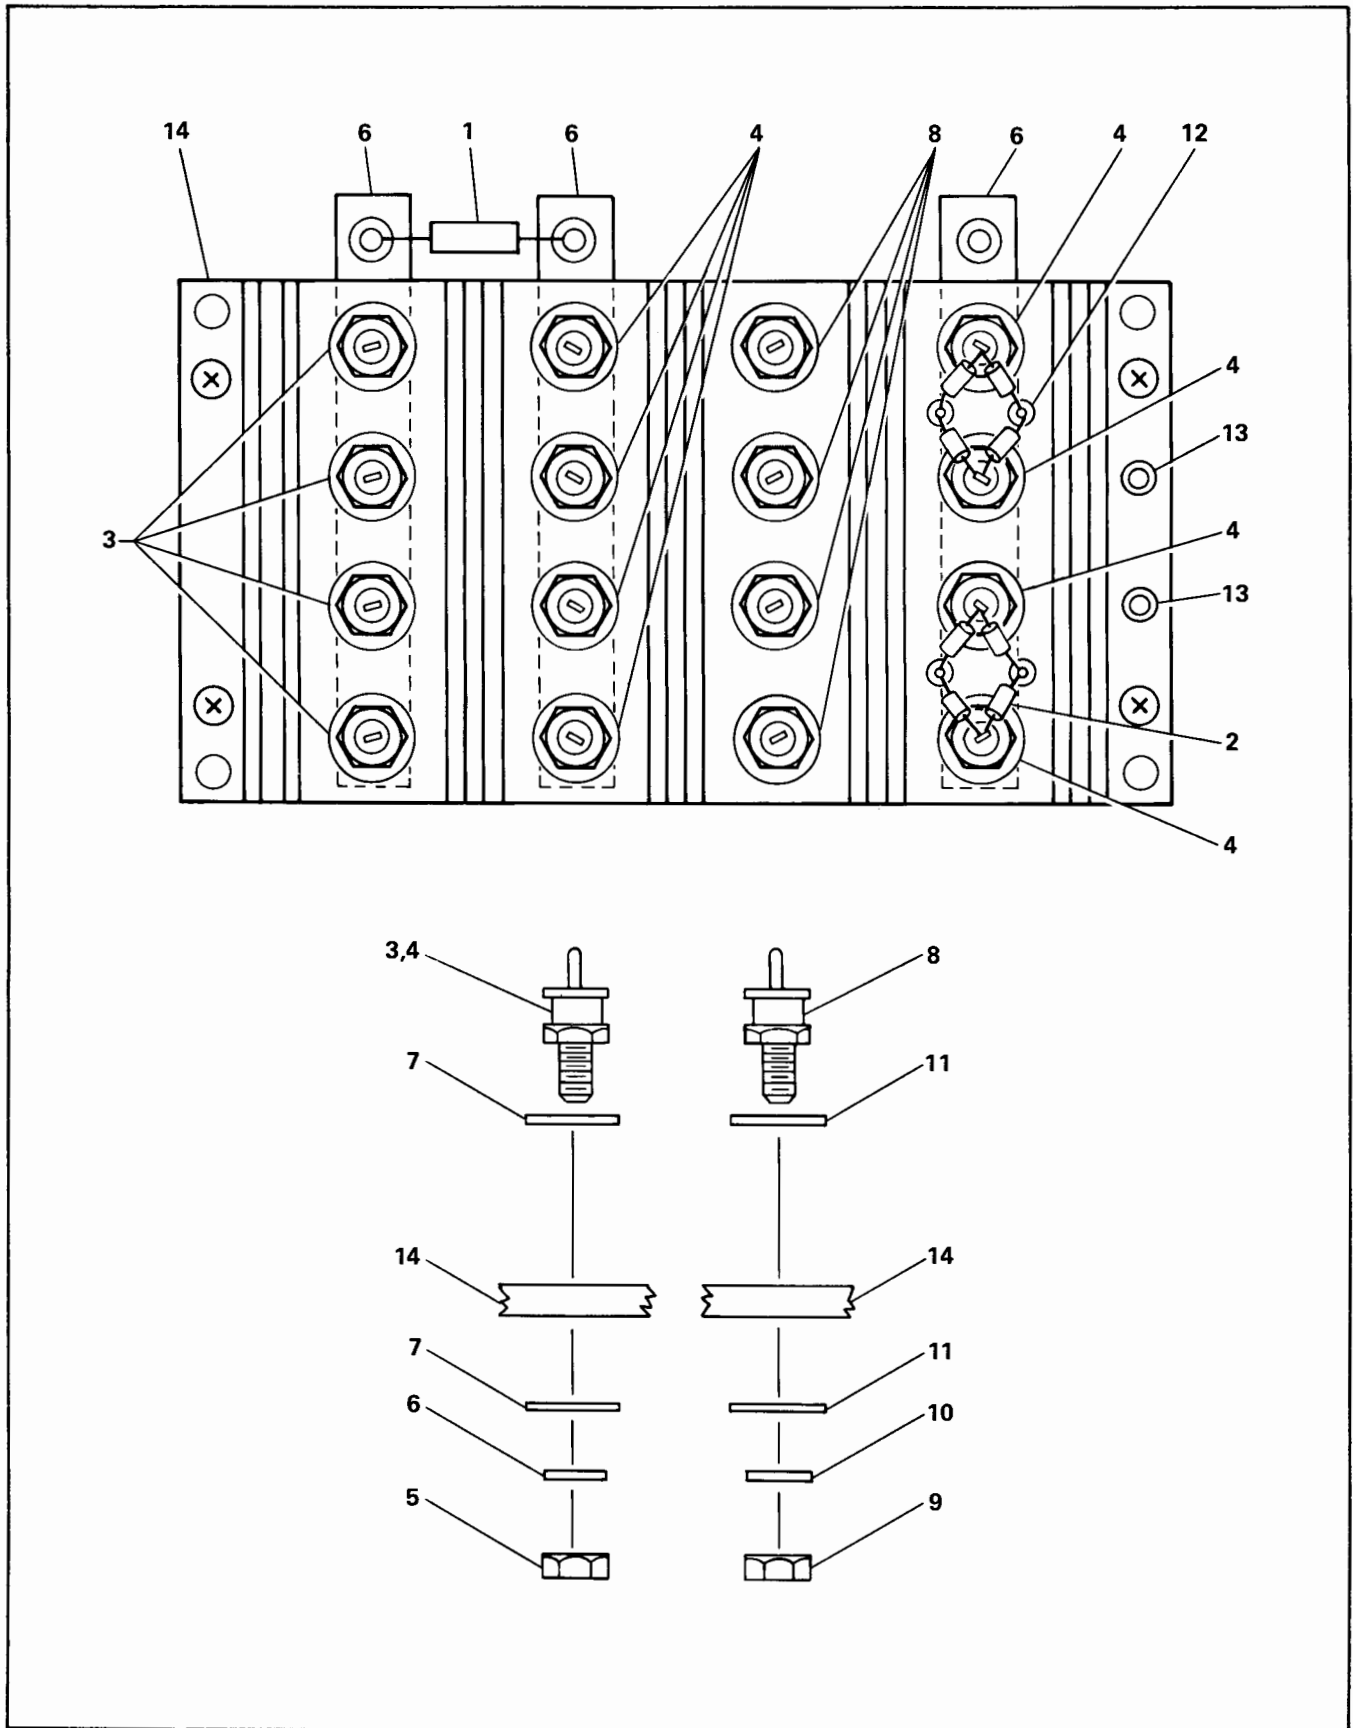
±20 Volt Regulator Assembly, Exploded View
